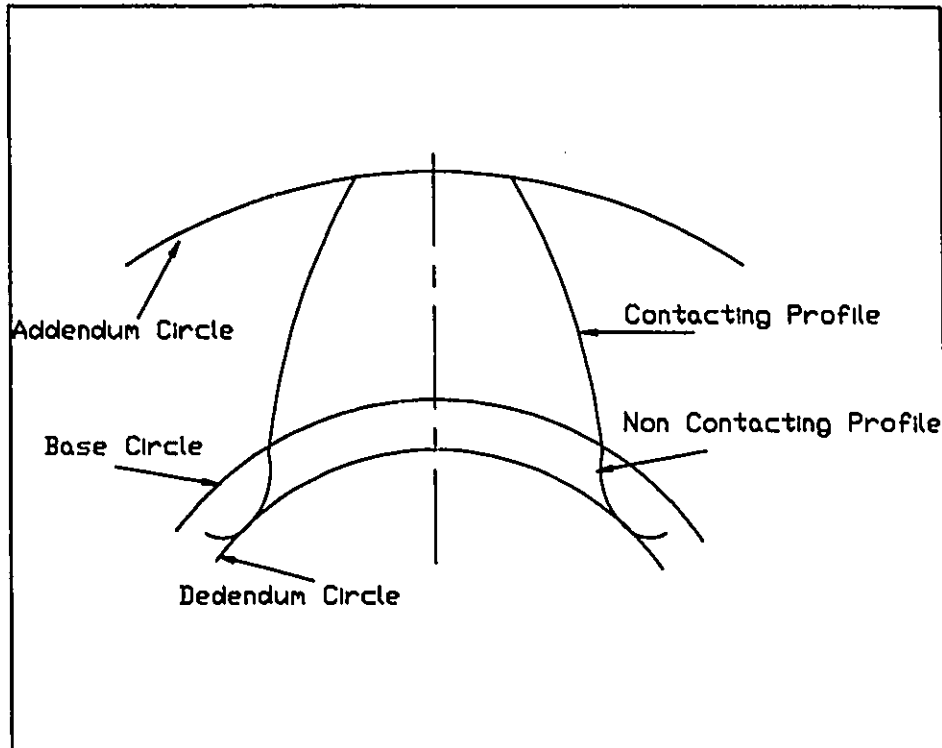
GEAR TOOTH AND ITS PROFILE
